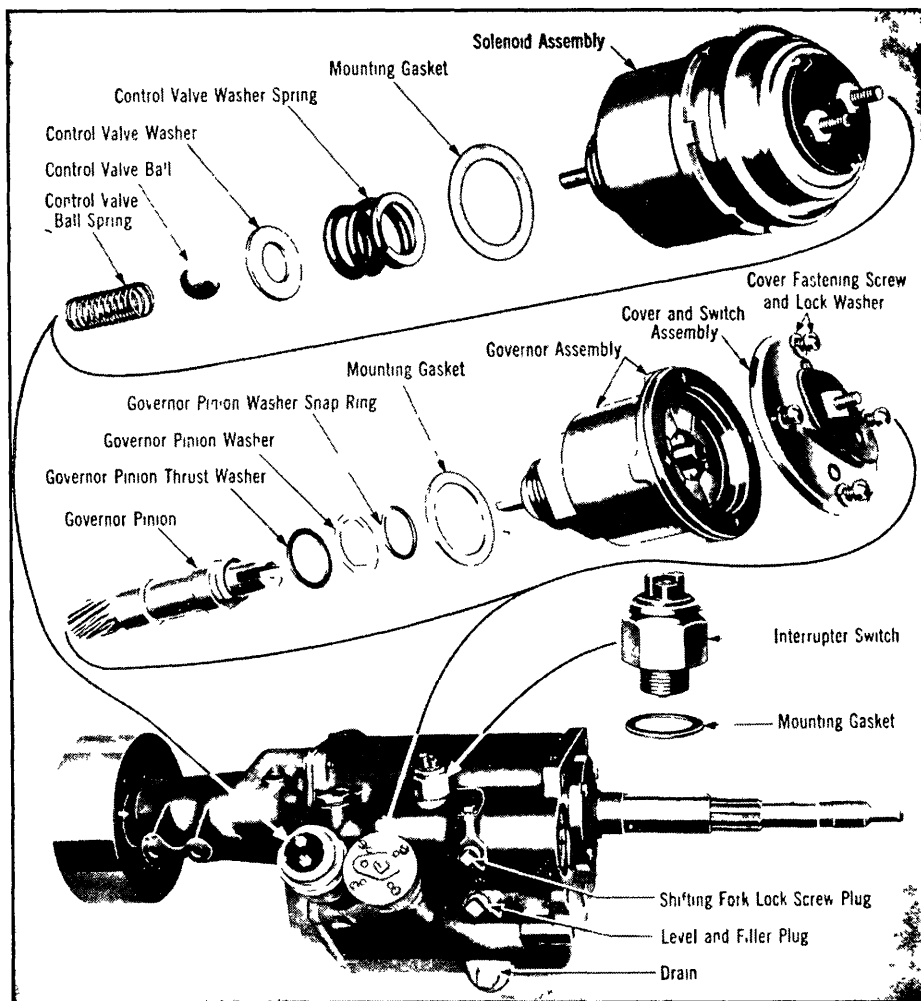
1949-52 automatic transmission controls. Transmission-driven, speed-sensitive governor and accelerator pedal manipulation determines speed at which shifts occur up or down. Solenoid operates hydraulic valve that controls action of shift cylinder. Interrupter switch mechanically shifts ignition to facilitate shifts down to a lower gear.
